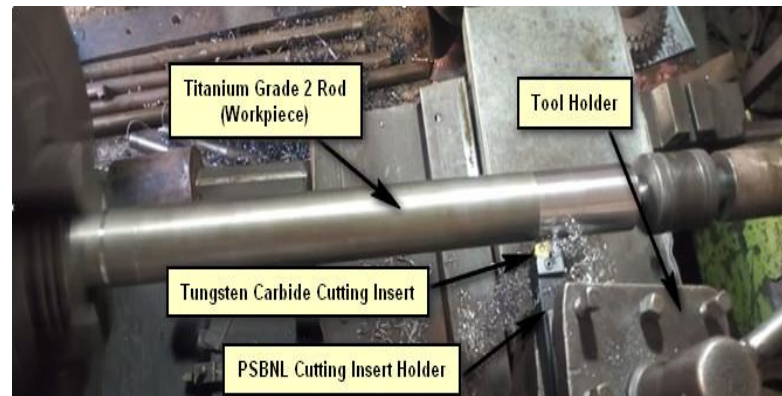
Three-jaw self-centered Lathe machine set up for turning operation.
